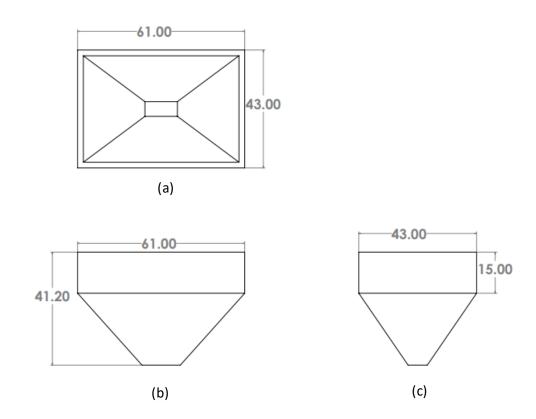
3D model of hopper (a) Top view, (b) Front view and (c) Side view
